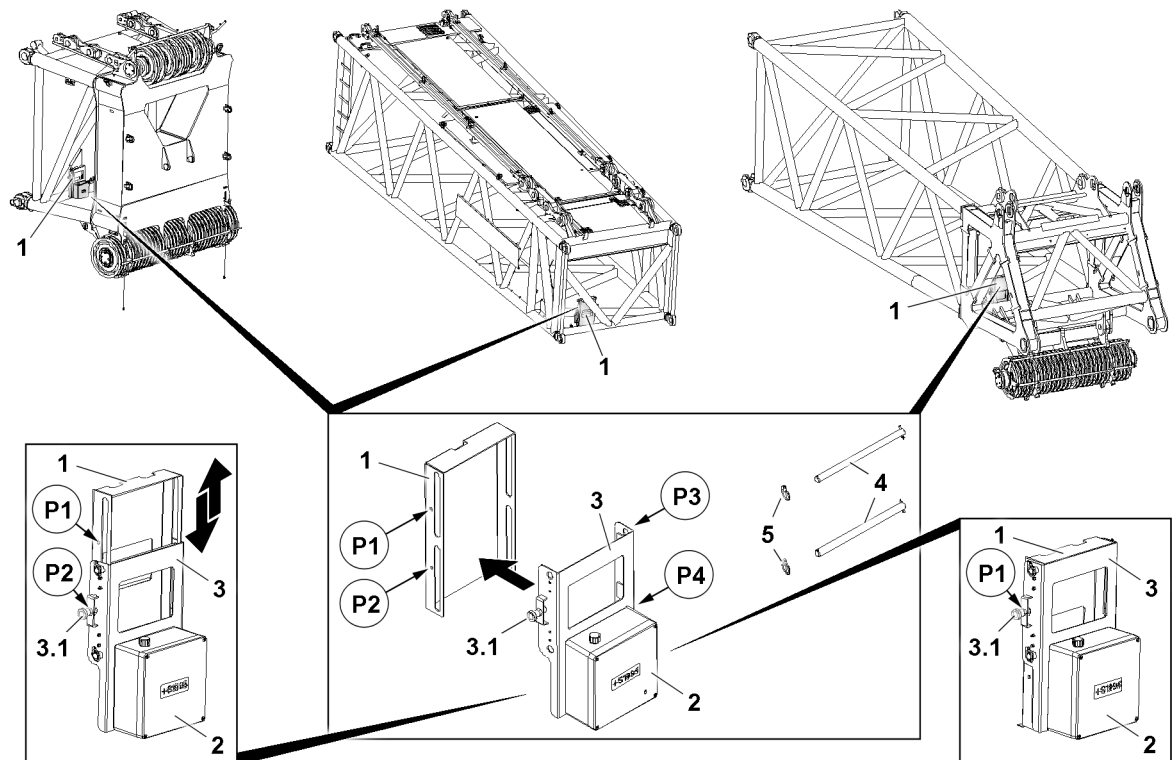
Assembly plate Variation 1: Assembling the radio receiving unit, examples for the installation positions
